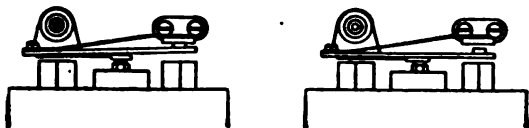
Opened and closed positions of Westinghouse cut-out switch
